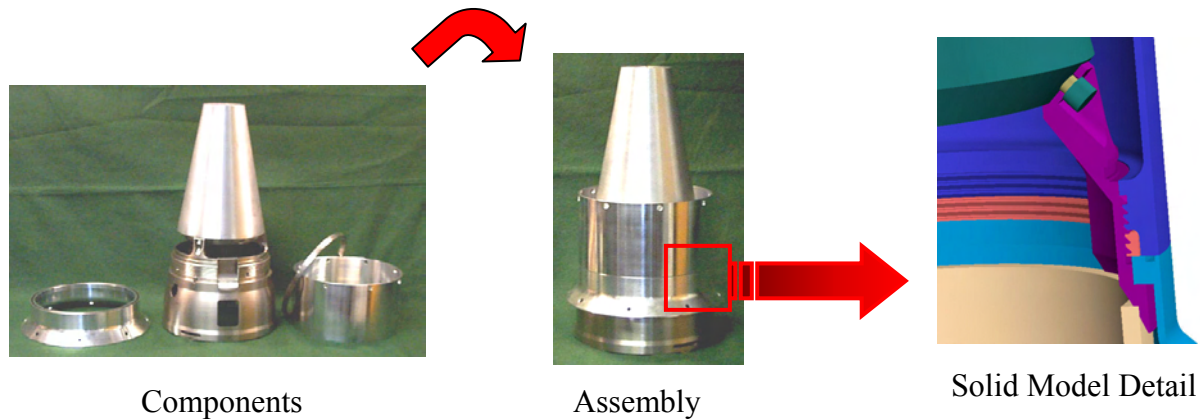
The Threaded Assembly, Components, and Detail of the Manufacturing Joint
